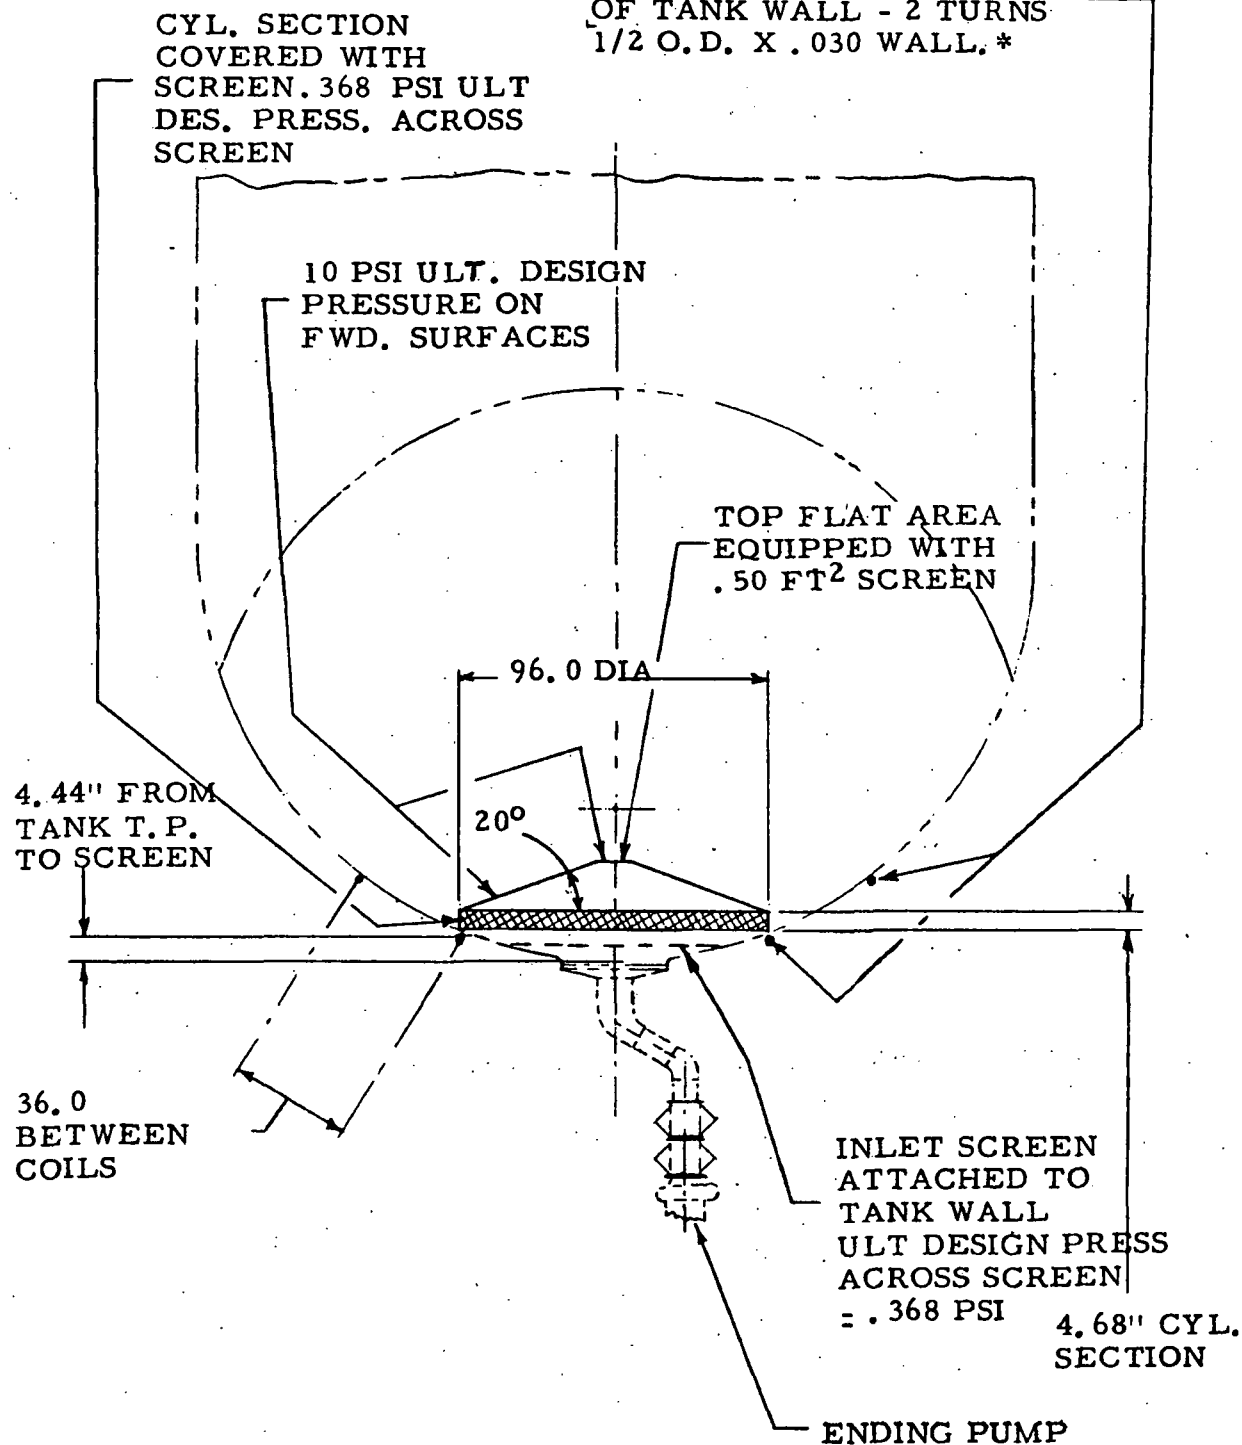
Oxidizer Tank Reservoir General Arrangement and Design Ground Rules
